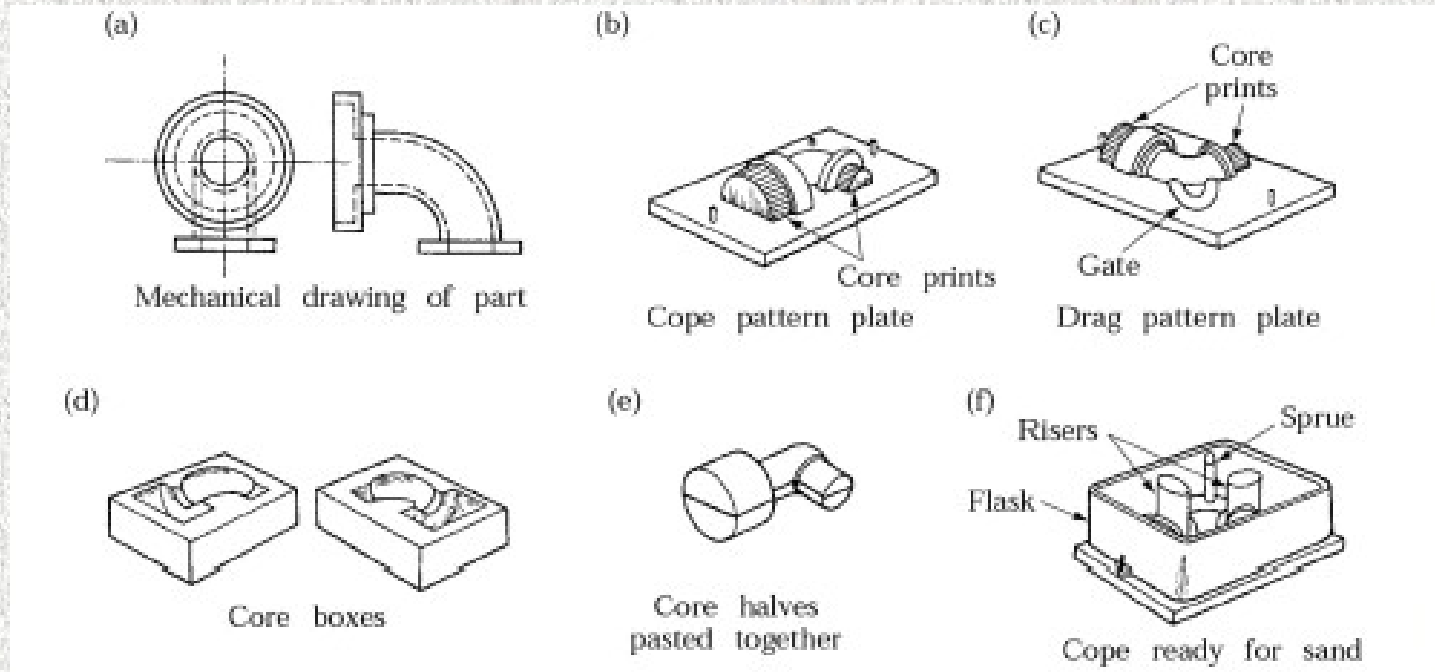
Schematic illustration of the sequence of operations for sand casting. *Source:* Steel Founders' Society of America. (a) A mechanical drawing of the part is used to generate a design for the pattern. Considerations such as part shrinkage and draft must be built into the drawing. (b-c) Patterns have been mounted on plates equipped with pins for alignment. Note the presence of core prints designed to hold the core in place. (d-e) Core boxes produce core halves, which are pasted together. The cores will be used to produce the hollow area of the part shown in (a). (f) The cope half of the mold is assembled by securing the cope pattern plate to the flask with aligning pins, and attaching inserts to form the sprue and risers. (continued)
